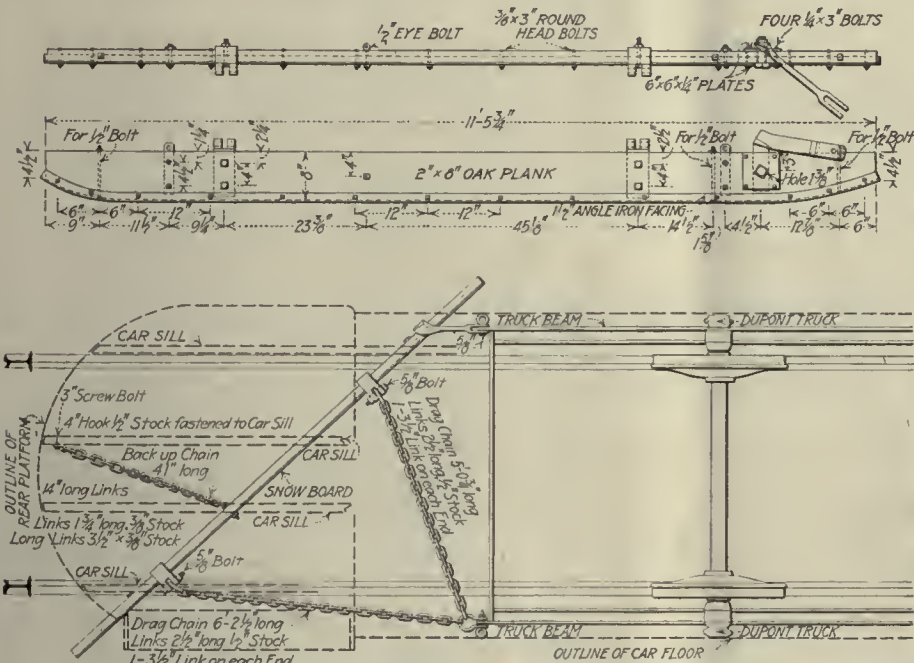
DETAILS OF CONSTRUCTION AND ATTACHMENT OF SNOW BOARD, DETROIT UNITED RAILWAY. FIG. 2—SNOW BOARD IN OPERATION ON DOUBLE-TRUCK CAR
